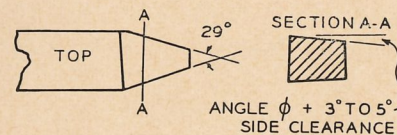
Tool bit formed for cutting an external Acme thread. To determine angle ϕ , refer to Figure 40, page 25.
